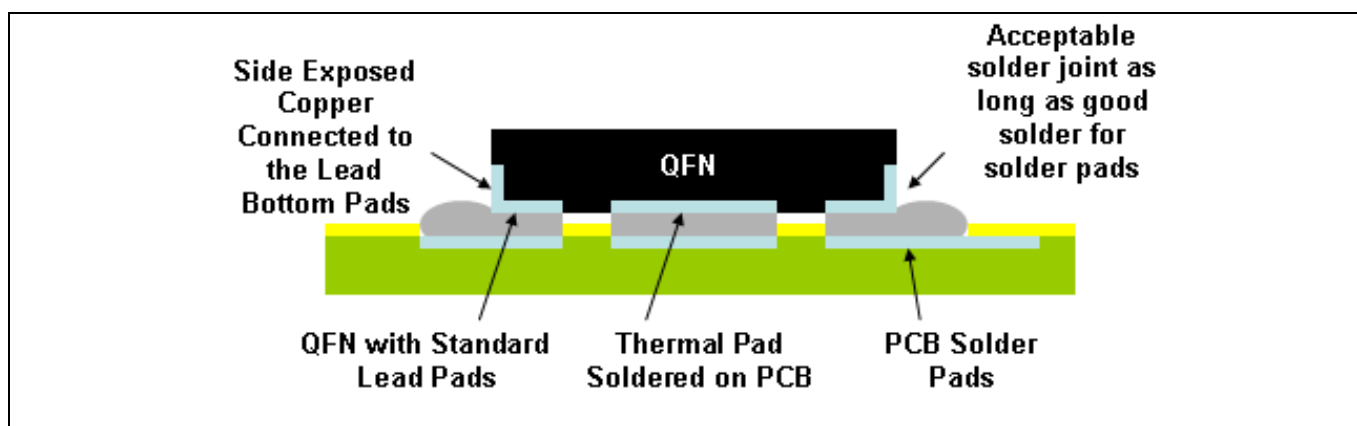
Cross-section view of solder joint on standard QFN without pull-back design (acceptable solder joint)
